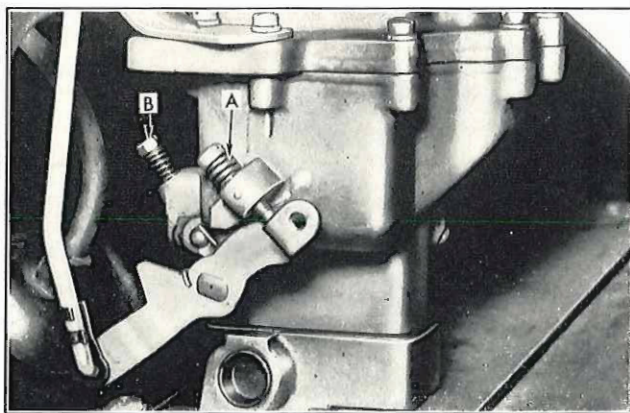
Idle Mixture (B) and Idle Speed (A) Adjusting Screws
